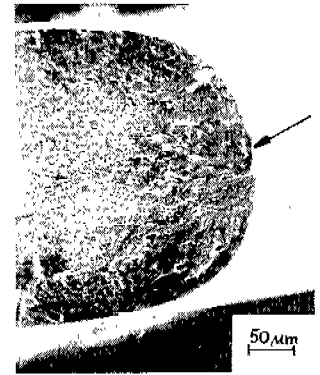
Initiation of fatigue fracture at non metallic inclusion.
